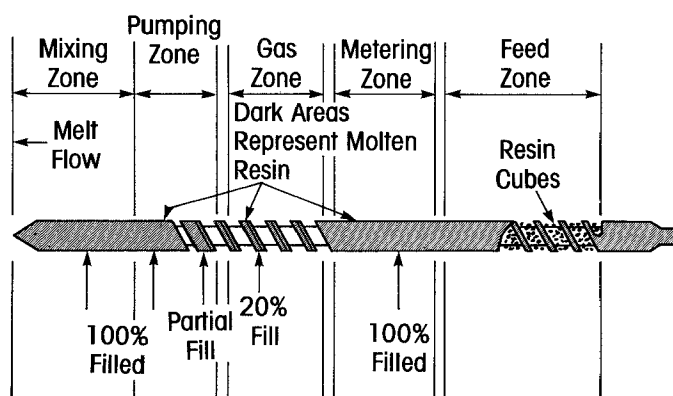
Schematic Drawing of a Melt-Filled Extrusion Foaming Screw for ETFE Resin
